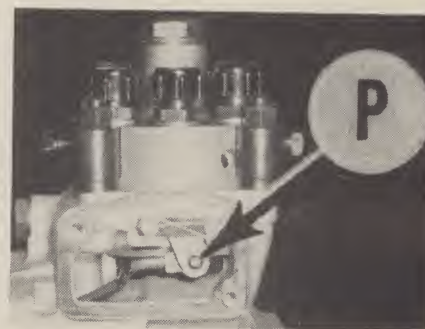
A—When pin "P" is removed from control arm the control arm shaft should rotate freely in shaft bearings. This is important.
